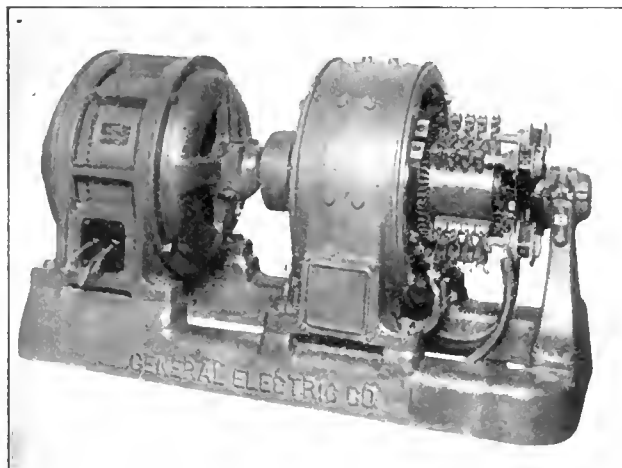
ARC WELDING SET, CONSISTING OF GENERATOR DRIVEN BY INDUCTION MOTOR.
